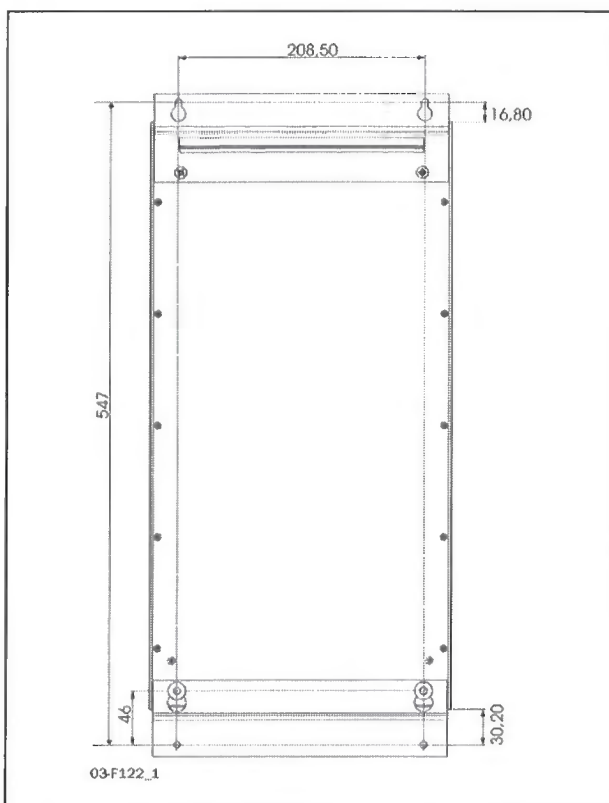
Hole pattern for MSF-170 to MSF-250 with upper mounting bracket instead of DIN-rail.
